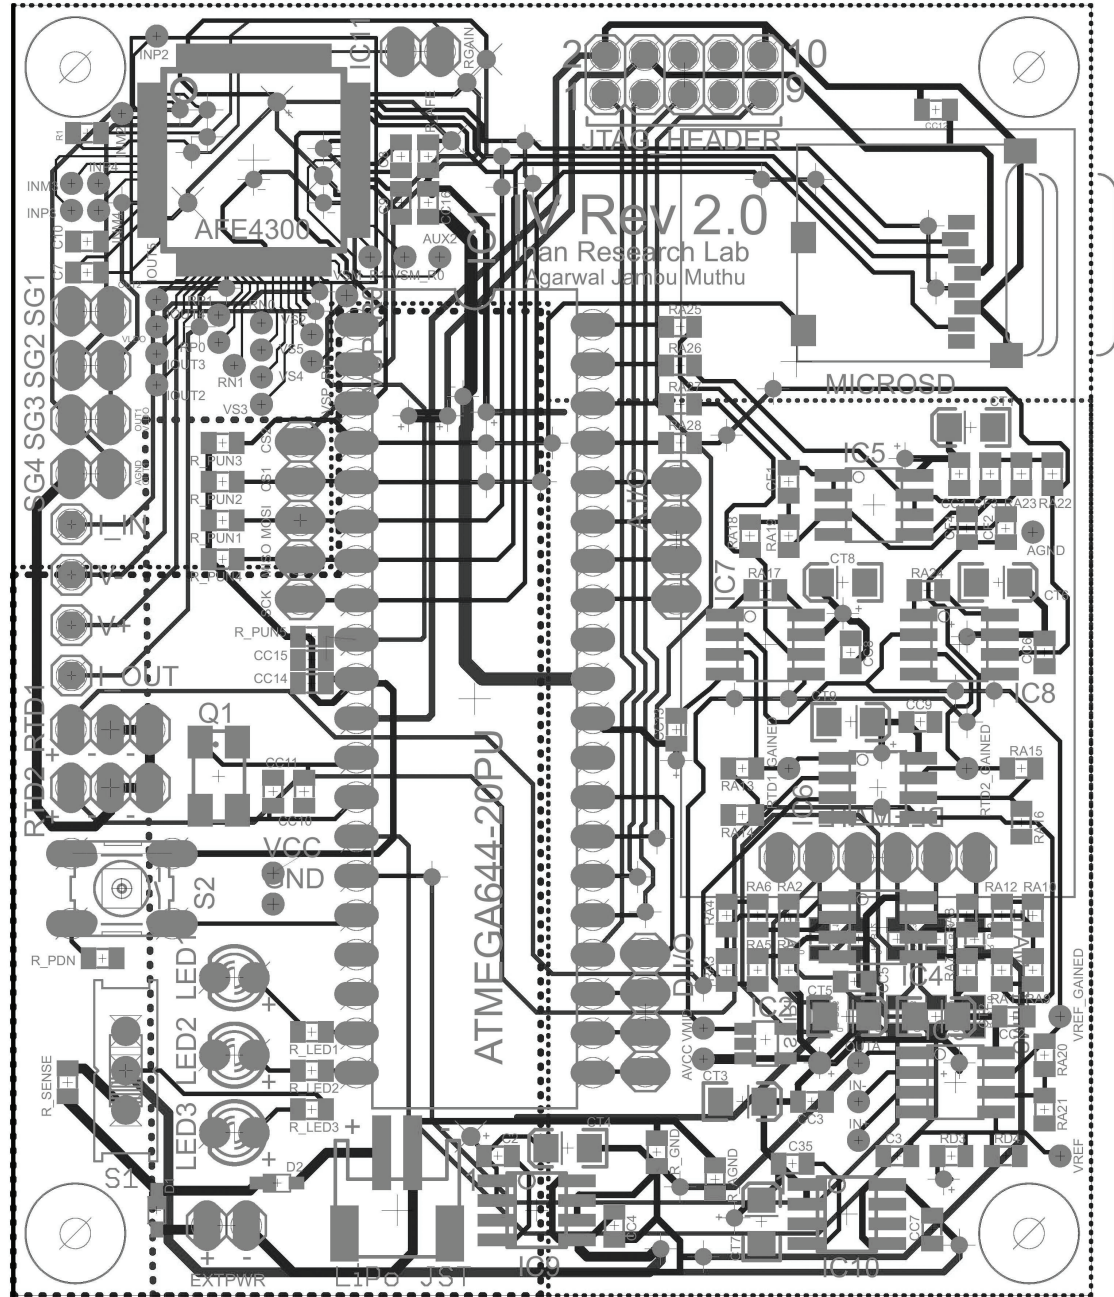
Layout for IV Rev 2 Printed Circuit Board, made with EAGLE V7.2.0
